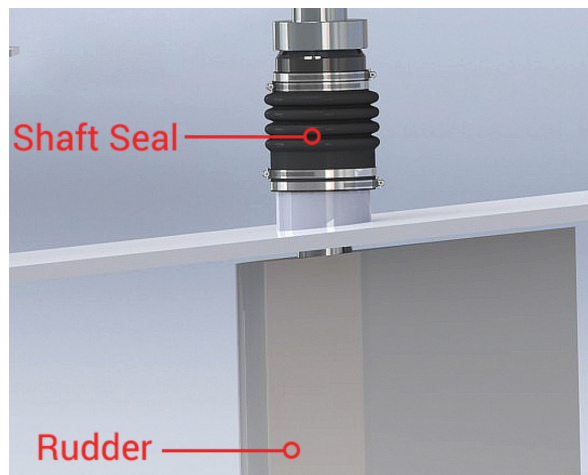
Schematic of rudder seal from a manufacturer, [40].
